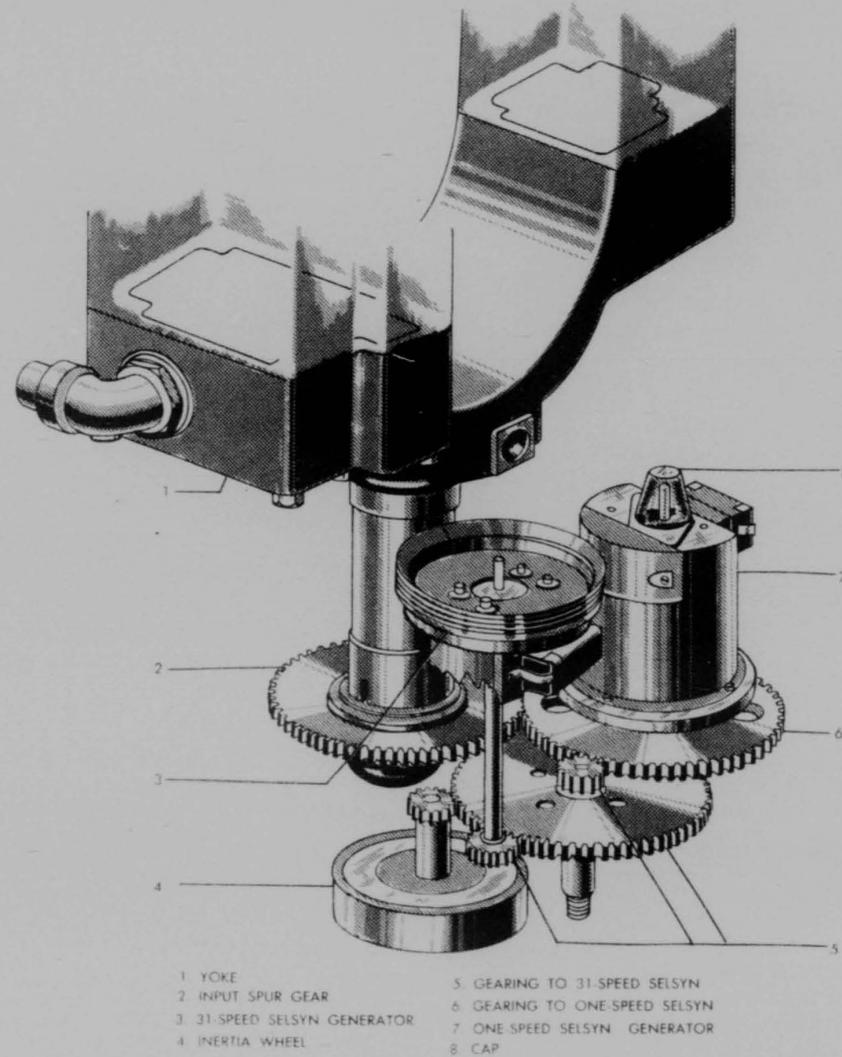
Cutaway View Showing Azimuth Selsyn Gearing.
